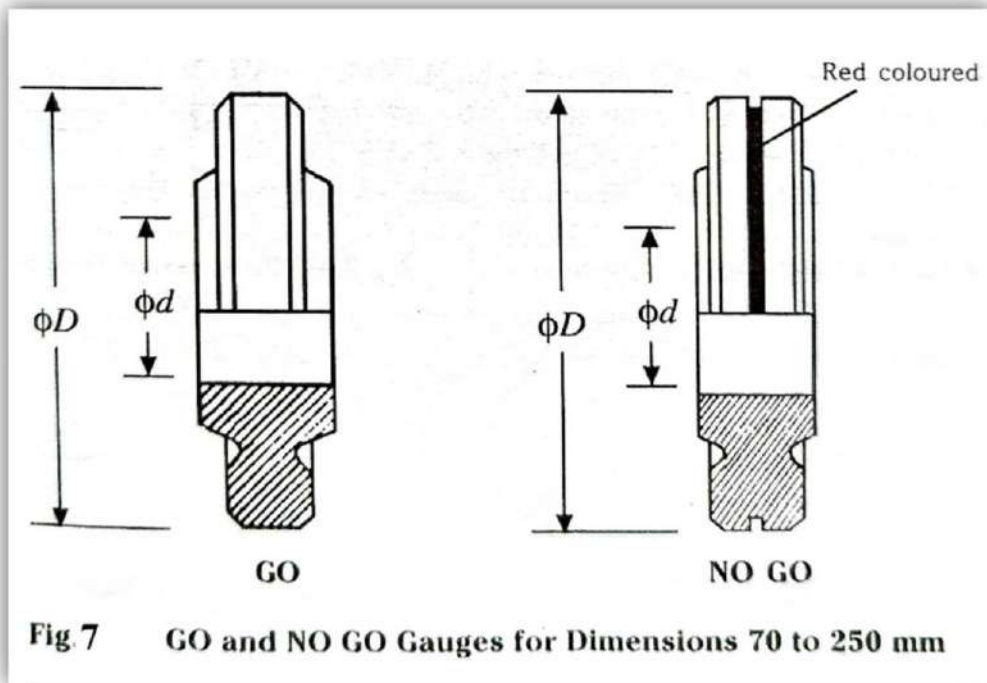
GO and NO GO Gauges for Dimensions 70 to 250 mm
